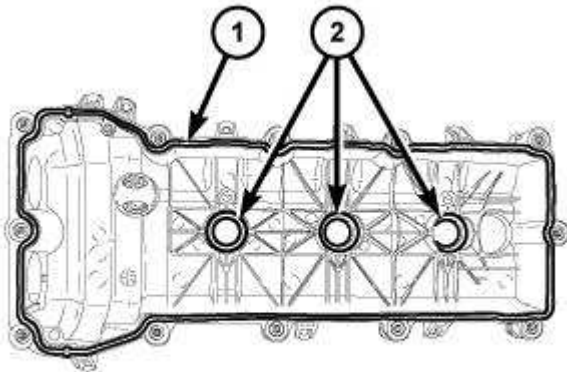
Cylinder Head Cover Gasket & Spark Plug Tube Seals
